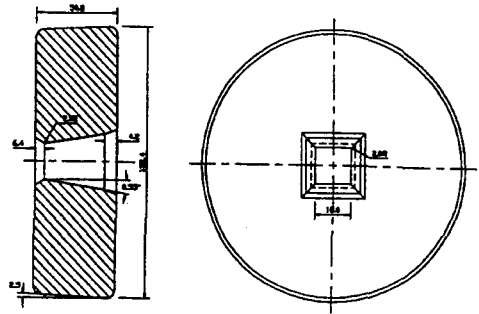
Initial modeling in the shaped drawing of a polygonal section from a round billet
